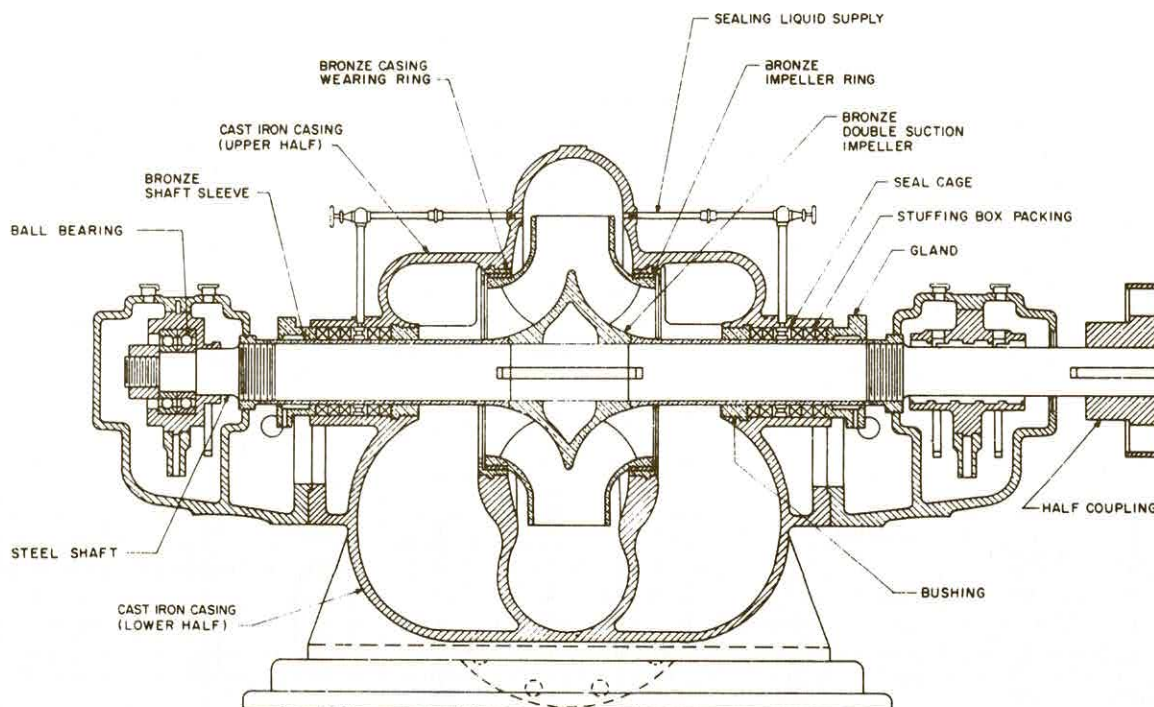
MAJOR PARTS OF A CENTRIFUGAL PUMP
